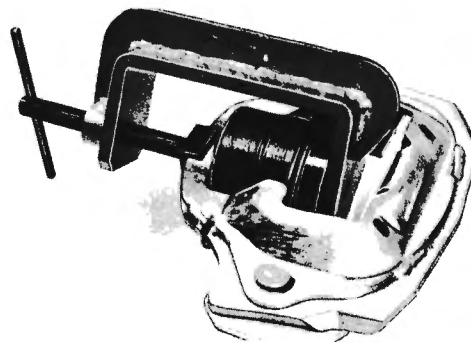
Screw vice for the brake piston, Tool No. 786043
